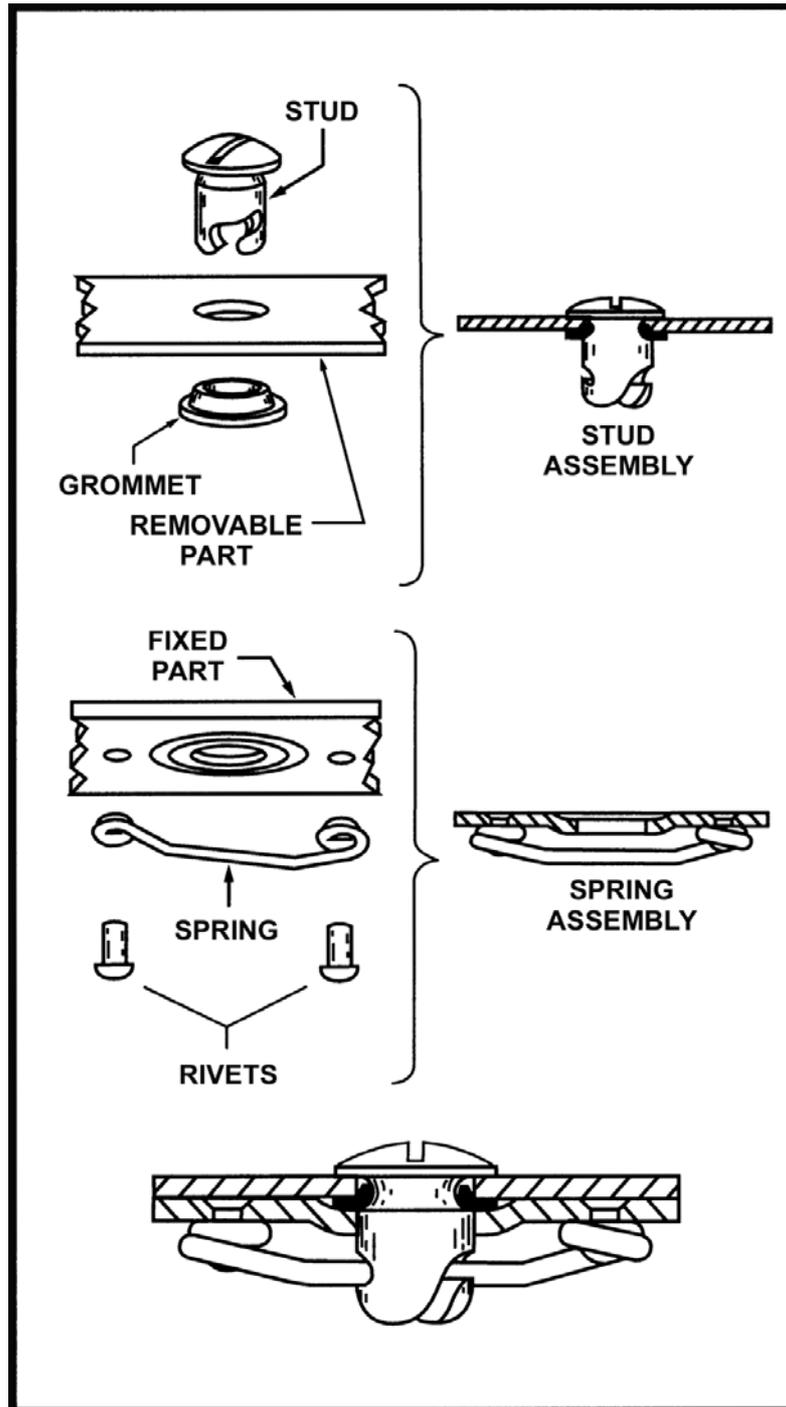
, With a standard Dzus fastener, a slotted stud engages a spring mounted to the fuselage. As the stud is turned onequarter turn, the spring locks the fastener in place.
